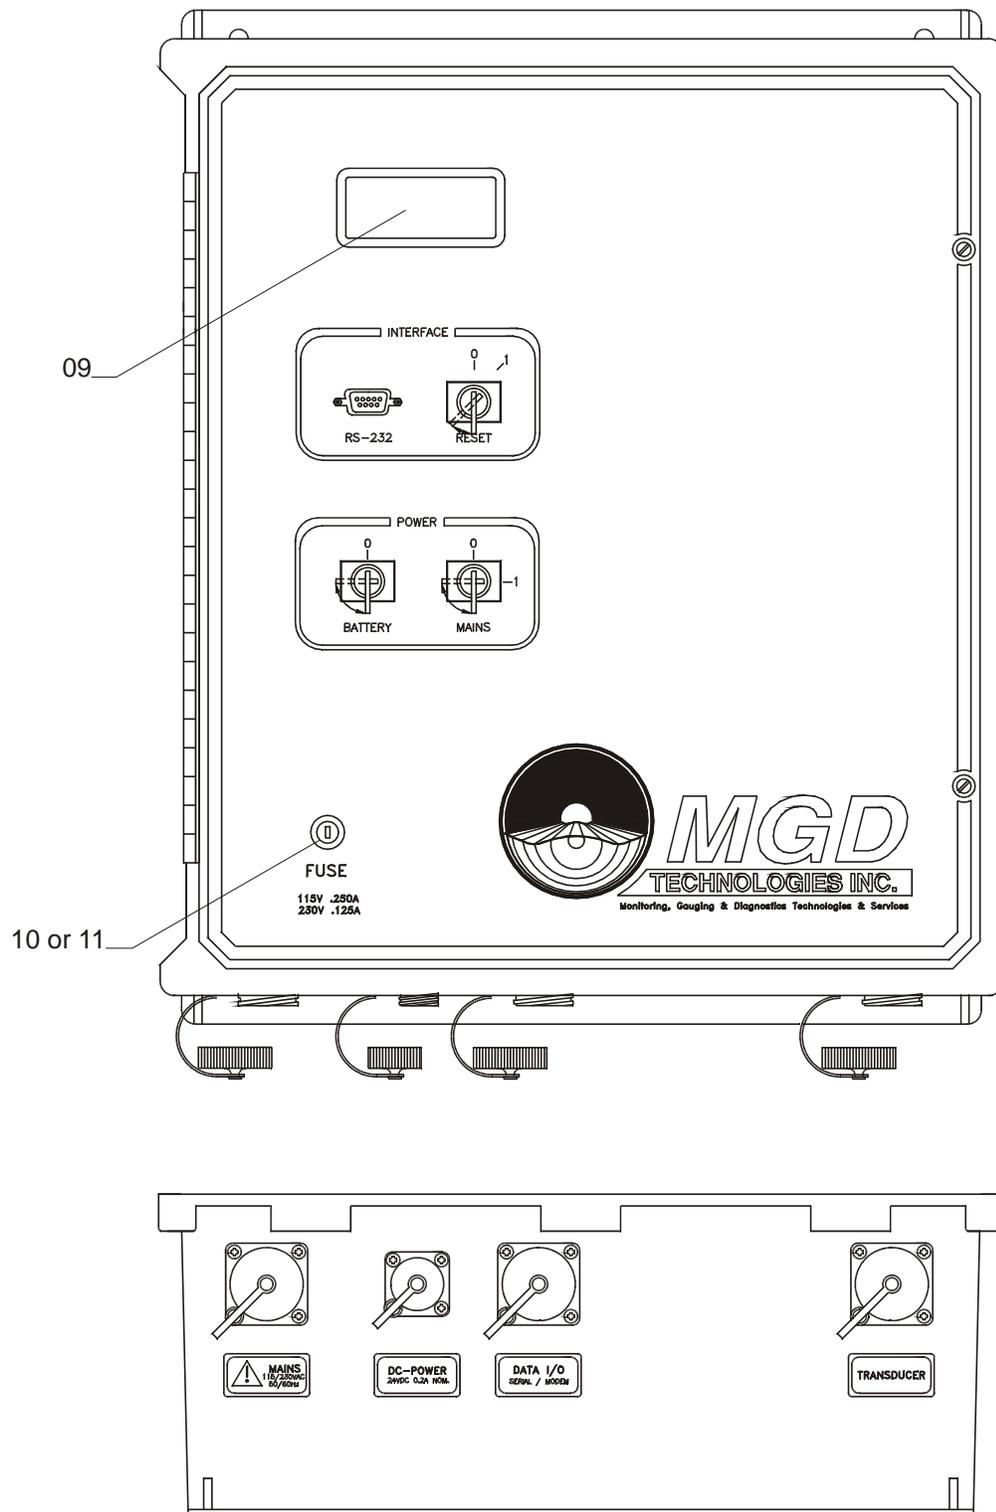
ADFM Electronic Housing (Exterior View) – Replaceable Parts Identification
